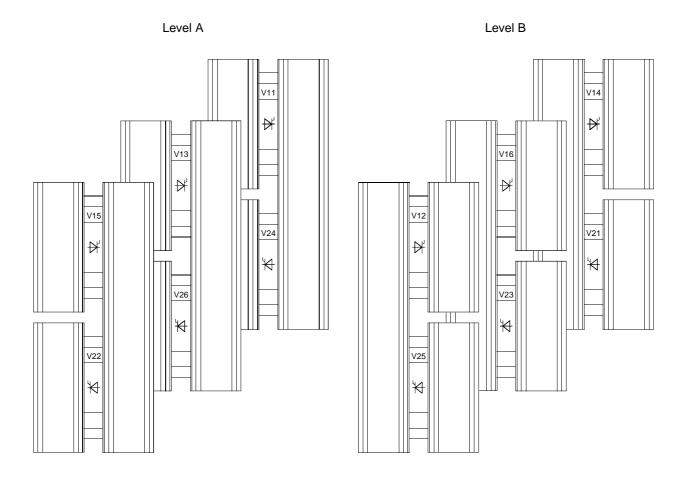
Arrangement of the thyristor blocks, view from right-hand side of unit, Size K (see dimension drawing in Section 2.4)
